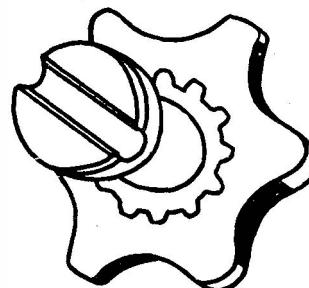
When properly assembled, slot in end of drive link must align with valley of inner gear as shown to provide correct valve timing.
